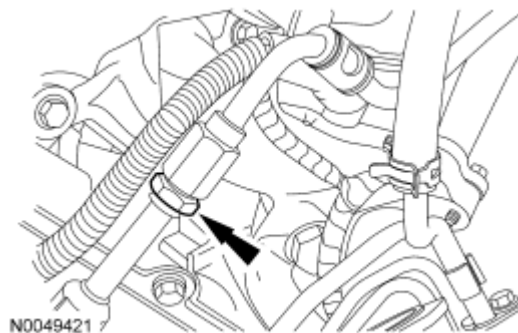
Locating Power Steering Pressure (PSP) Tube Fitting
